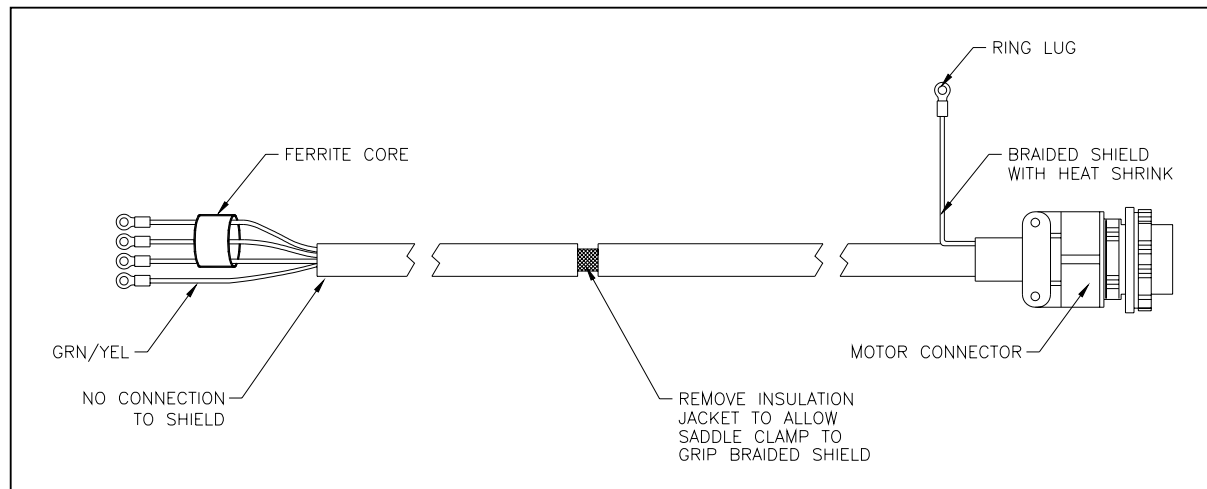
Alternate Method to Ground the Motor Armature Cable
